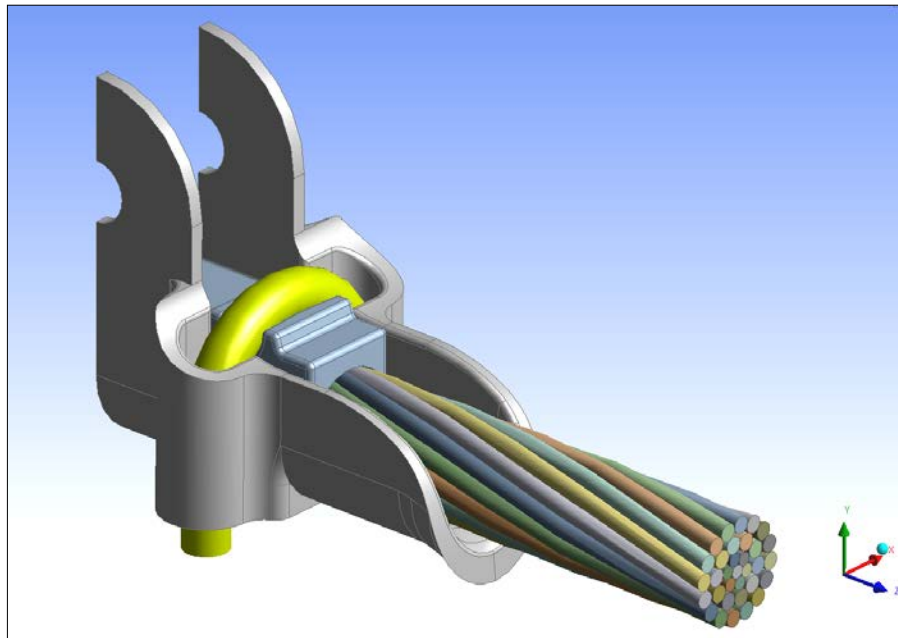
Drake conductor-clamp assembly solid model for fretting fatigue study
